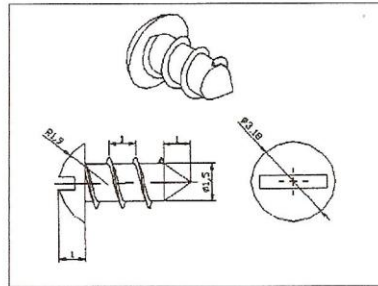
Dimensions and schematic geometry of the implant prototype.
